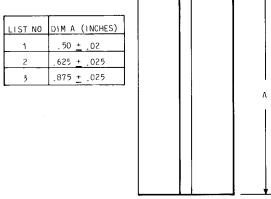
KS-16604-Type, Terminal Insulator Tools
